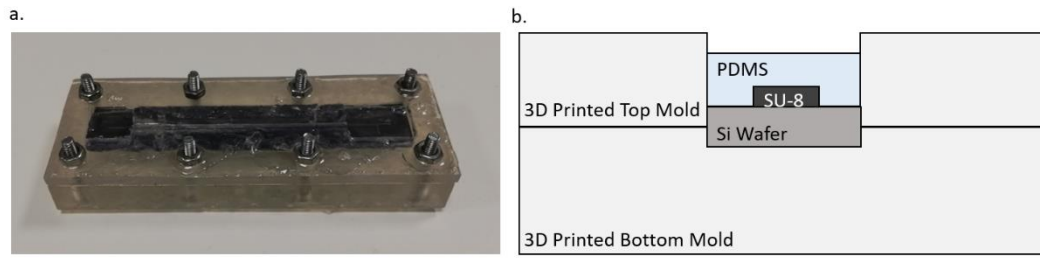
The mold of the microfluidic channel. a. The mold used for producing PDMS microfluidic chip and b. cross-section of the PDMS mold.
